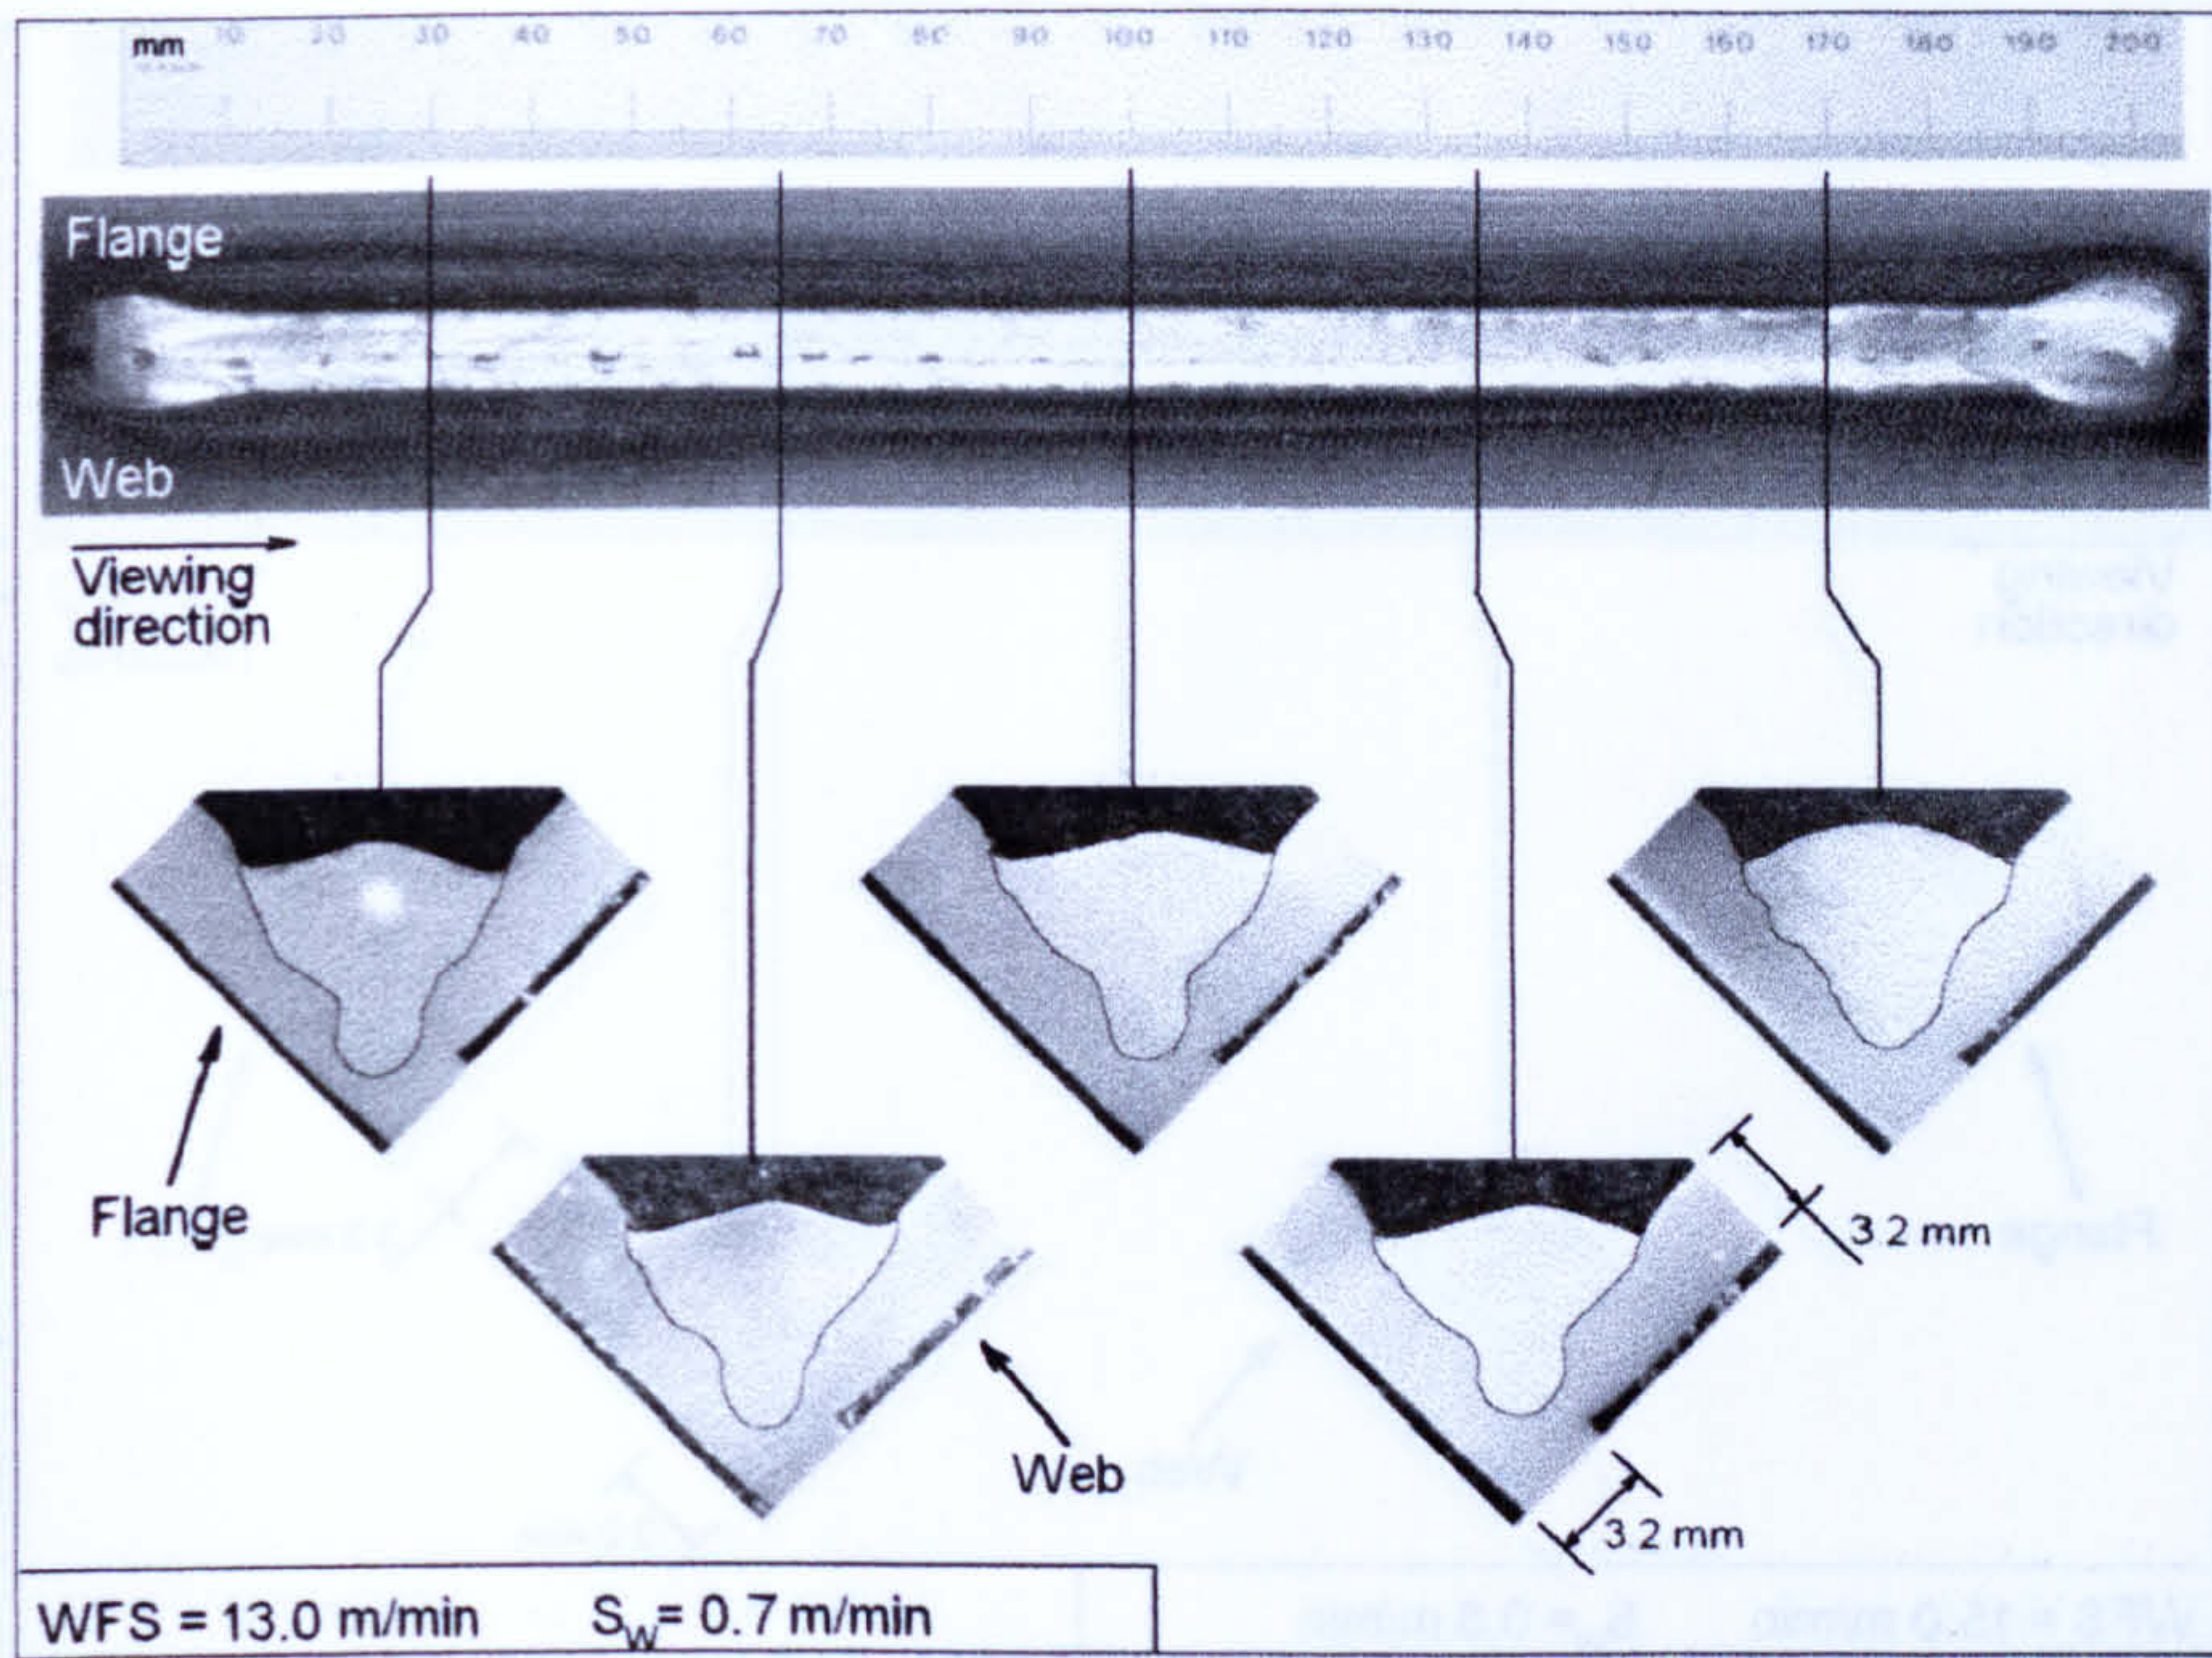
Welding data and bead geometry obtained from test M3
